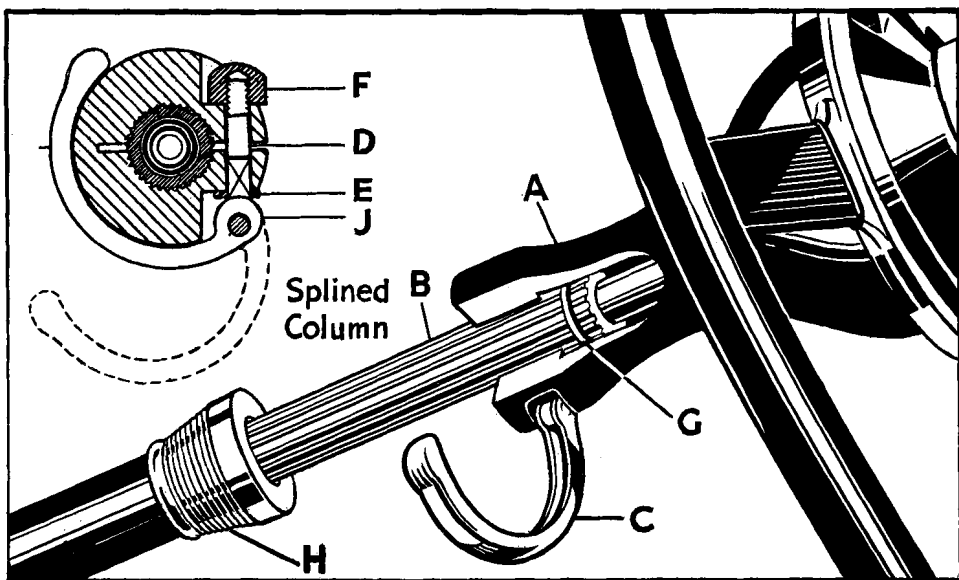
Illustration No. 20.—Diagrammatic view of adjustable steering wheel.
